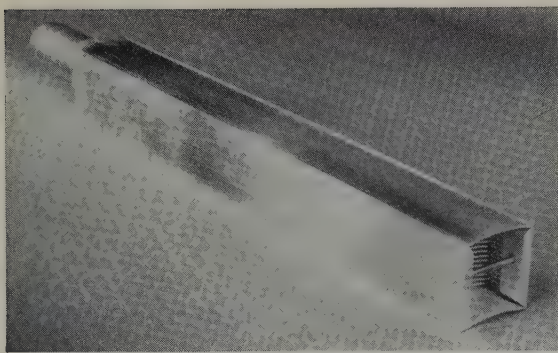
Bulk Shielding Reactor Fuel Element. This element consists of 18 roll-clad composite plates with a fuel section of a 14 wt % U-Al alloy 20 mils thick clad on both sides with 20 mils of 1100 aluminum. The plates are assembled into an integral unit by brazing, using an aluminum-silicon eutectic composition alloy.
